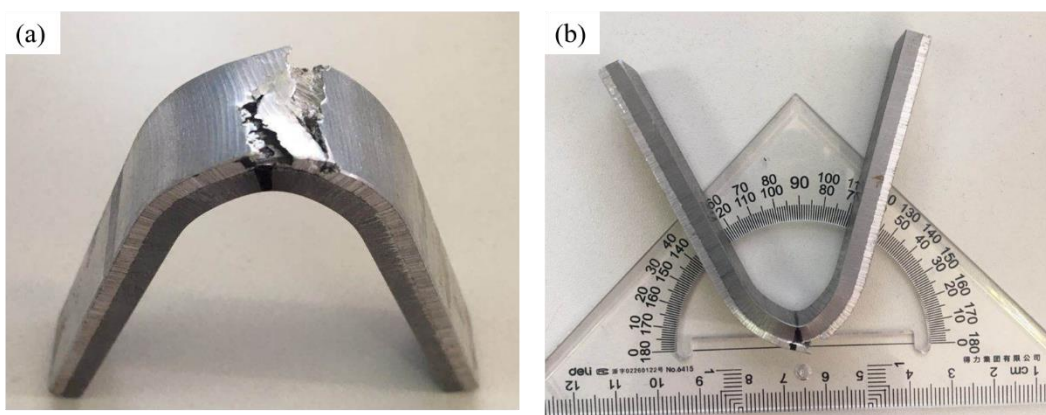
Bending specimens of composite plate after FSP with four passes: (a) tensile face; (b) bending diagram of angle measurement
